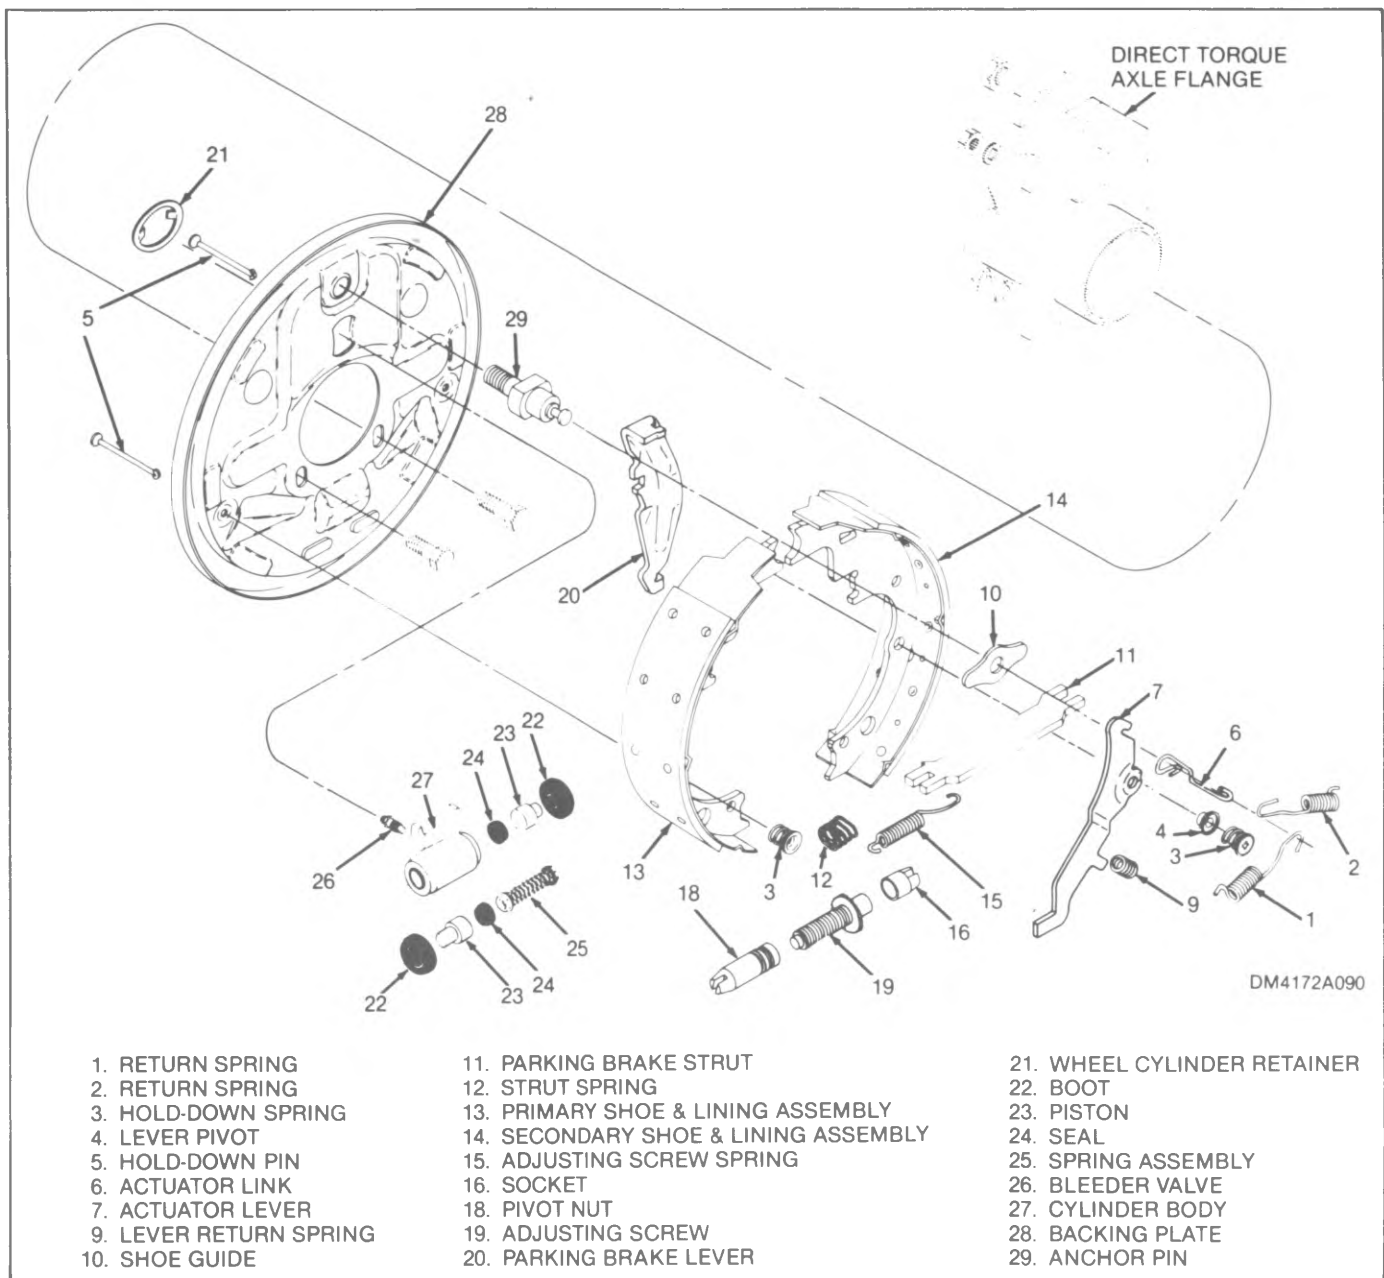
Direct Torque Drum Brake With Release Actuated Adjuster
